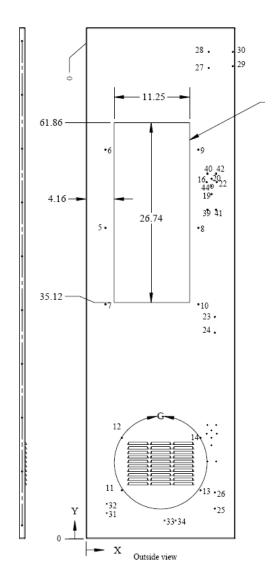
OUTSIDE VIEW OF FRONT DOOR WITH CUTOUTS FOR THE INTAKE. Cutout dimensions and hole locations are depicted in TABLE 1 on the next page.
